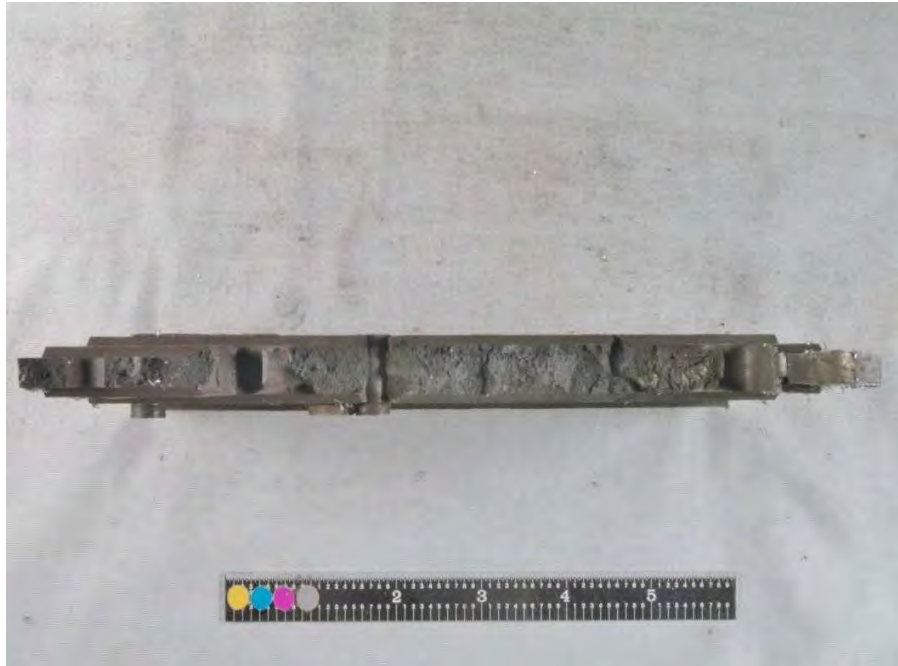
SID 14874 subsegment "A3" finger pinned attachment fracture surface.
